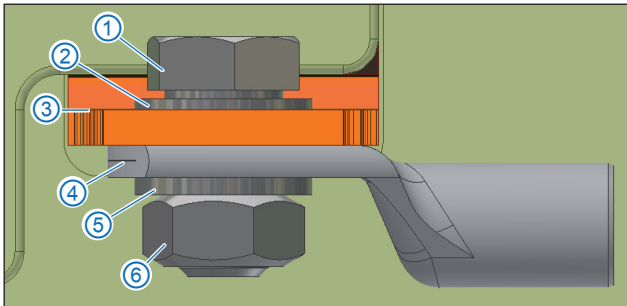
Mounted ring terminal of the HV-/HV+ shielding
